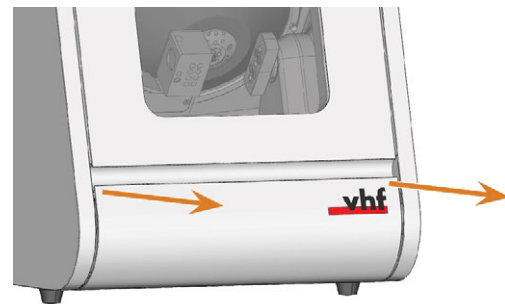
OPENING THE COOLING LIQUID DRAWER
